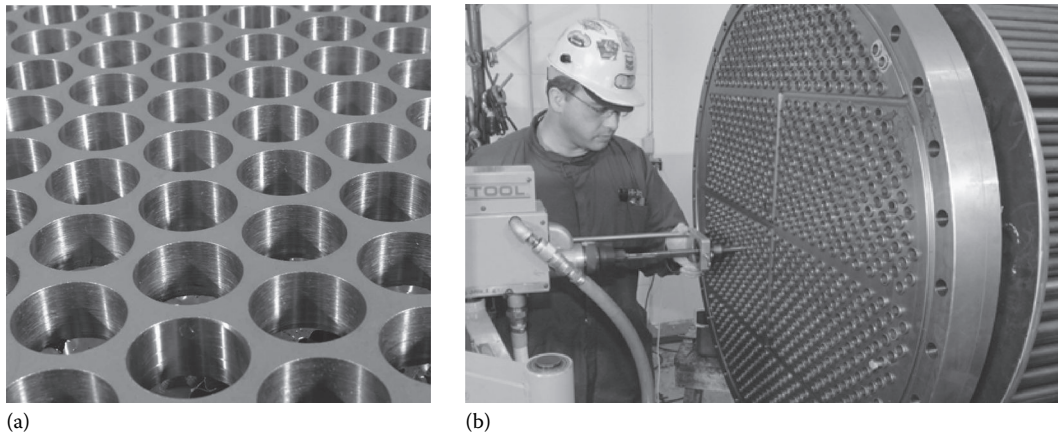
Drilled tubesheet. (a) A section of drilled tubesheet and (b) a tubesheet under tube rolling-in progress. (Courtesy of Edmonton Exchanger & Manufacturing Ltd, Edmonton, Alberta, Canada.)
